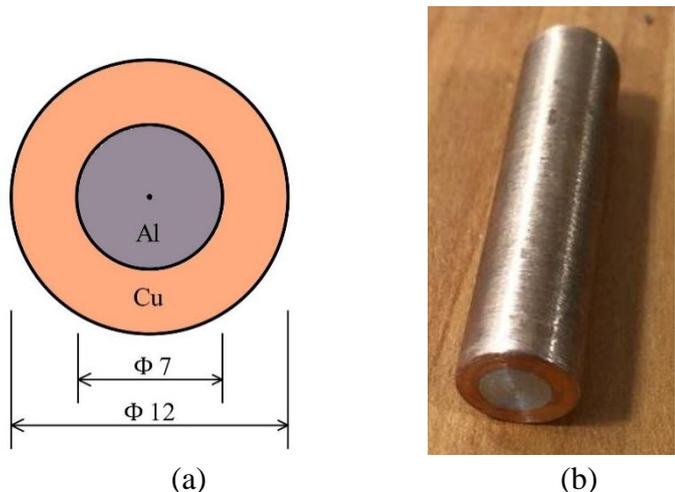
a) Dimensions of cross-section b) bimetallic rod sample
